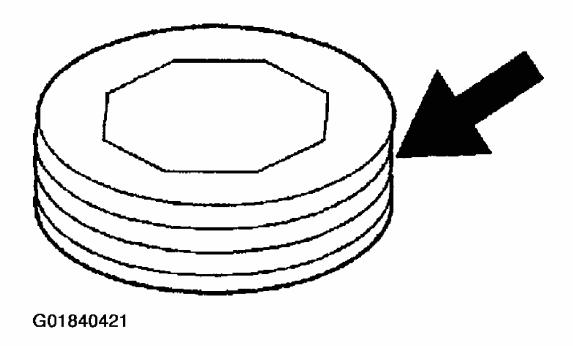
Applying Sealant To Oil Fill Plug Threads
